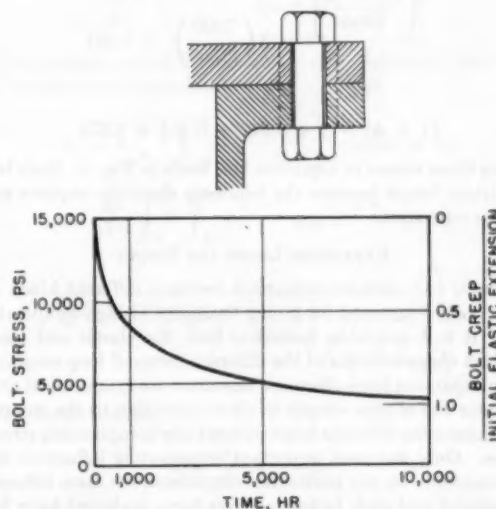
BEHAVIOR OF AN ORDINARY BOLTED FLANGE WITHOUT A GASKET
